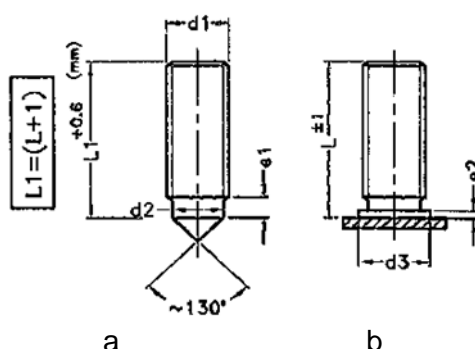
Display of dimensional parameters a) Before welding b) After welding
